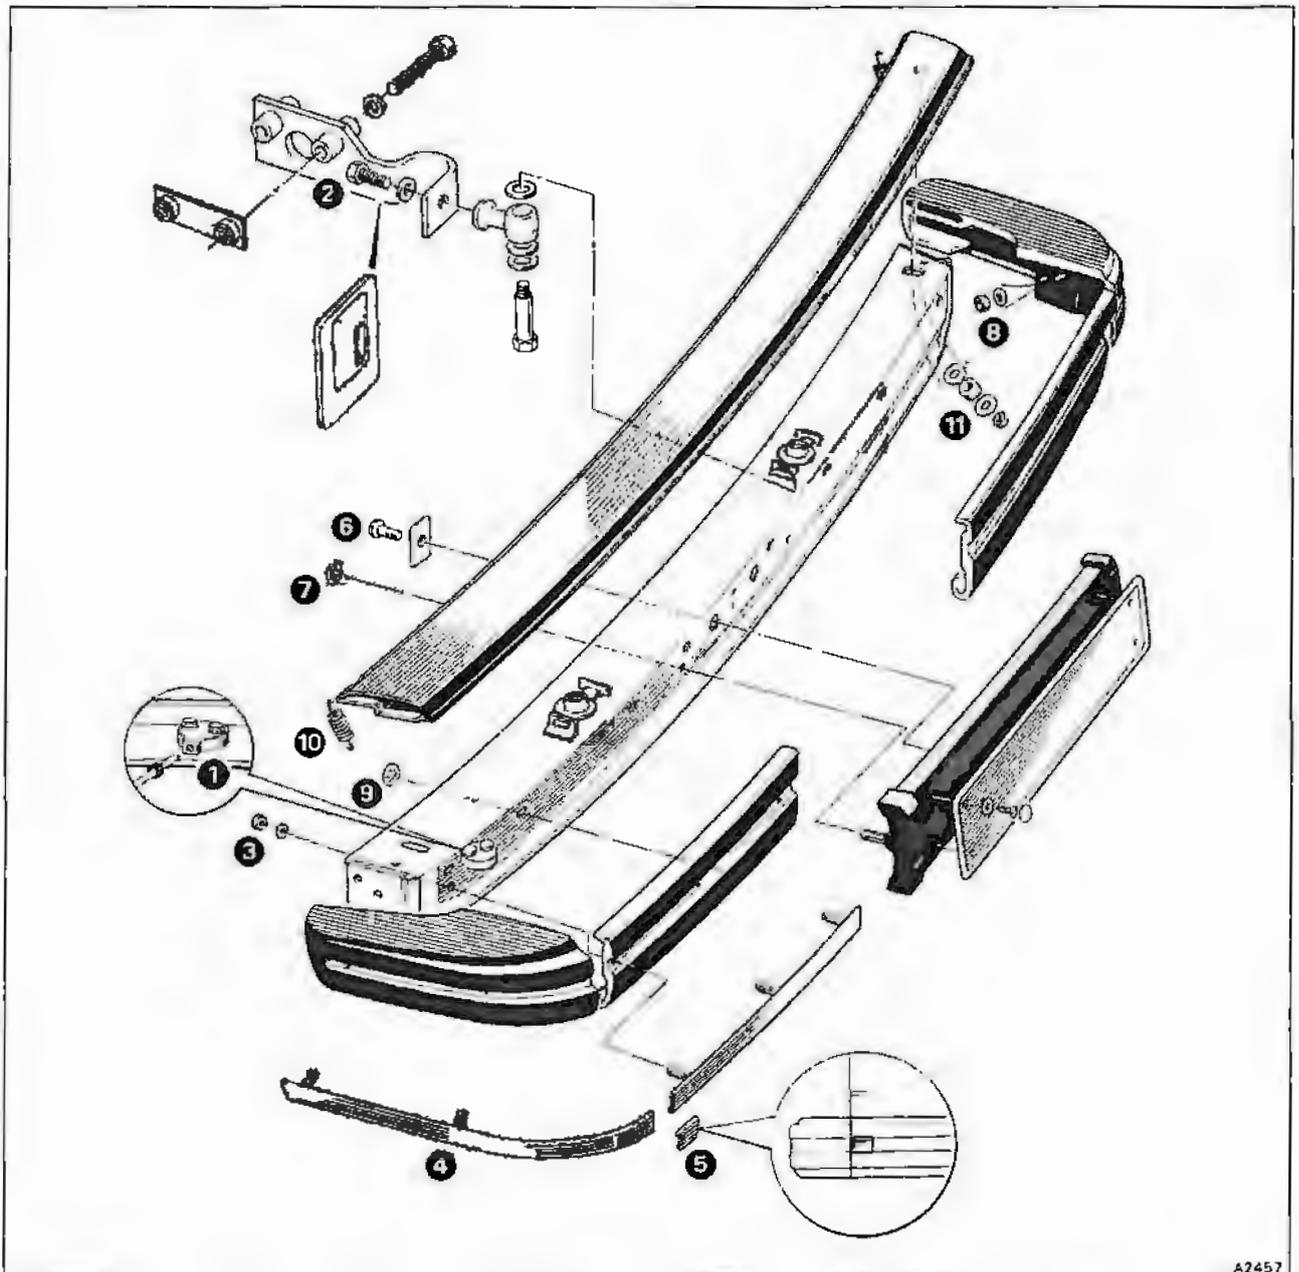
Front bumper assembly (incorporating a rectangular type number plate)
